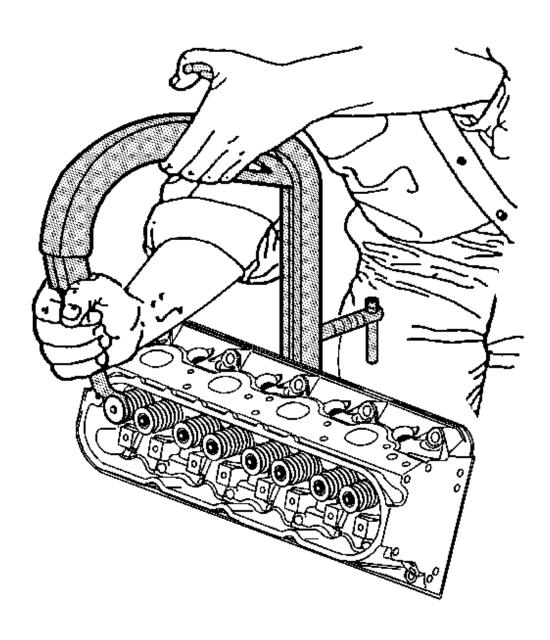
Compressing Valve Spring Using Courtesy of GENERAL MOTORS CORP.
